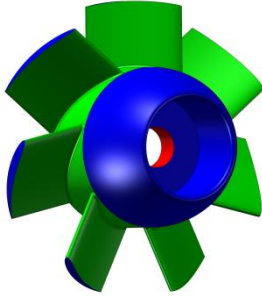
The blue surfaces indicate the first material which was removed in the initial CNC lathe setup.
